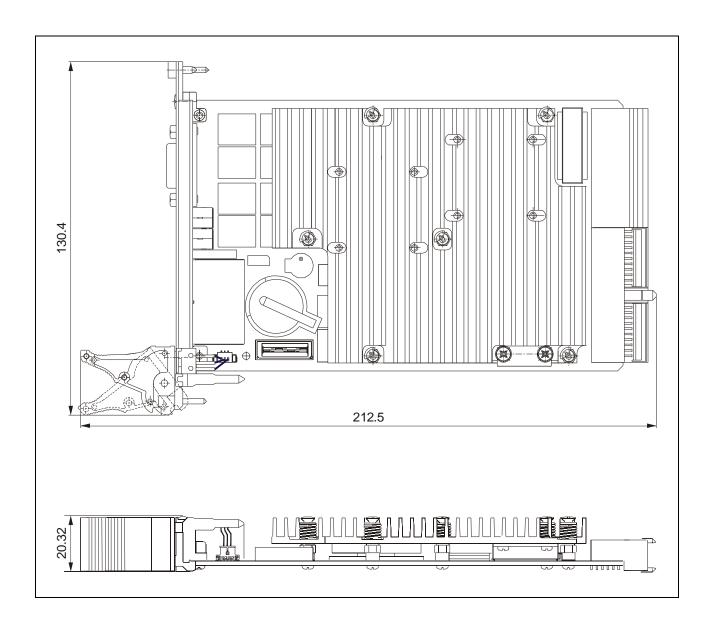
CPC506-01/02 Module Dimensions with R2 Heatsink (8HP)
